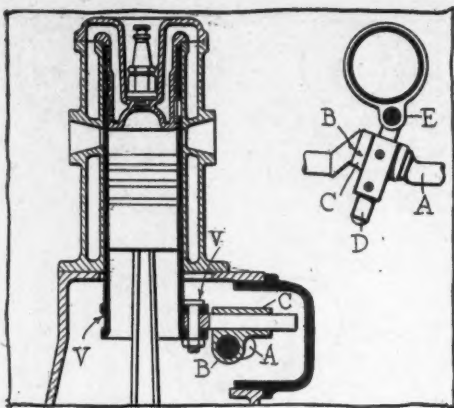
ARGYLL SLEEVE-VALVE MOTOR
